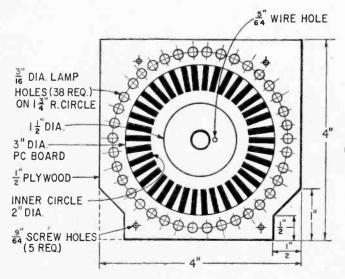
Commutator is an ideal printed-circuit project which is almost impossible to manufacture as an assembled unit in a home workshop.
